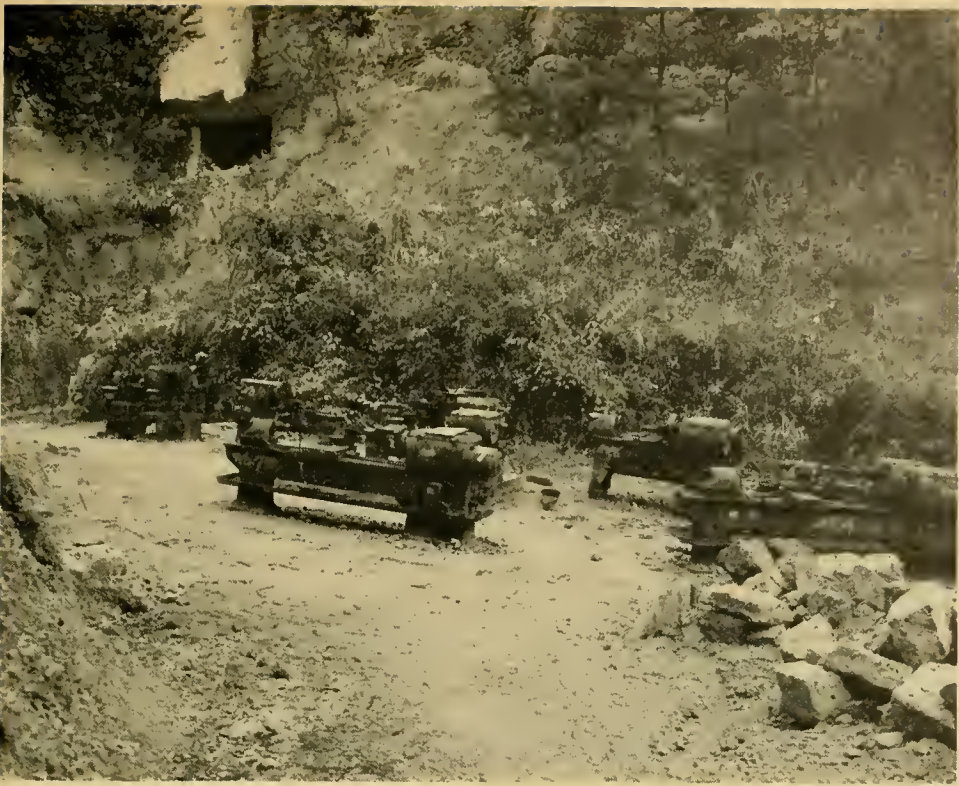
Machine tools awaiting installation underground, Kaneiryama Works at Shiroyama.
